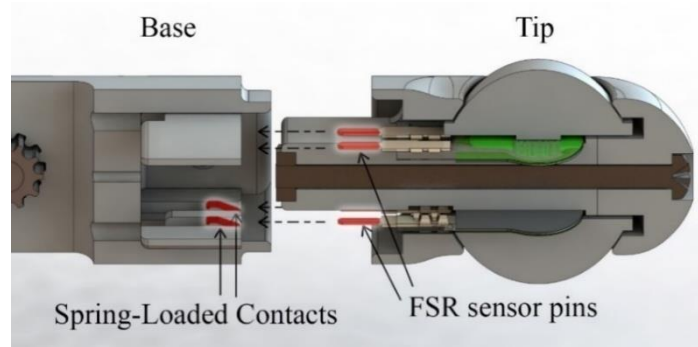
The sensor circuit is completed using spring-loaded contacts in the base opening.
